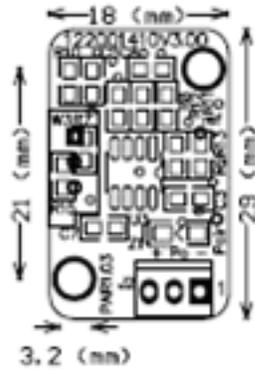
Drive Gas Pressure Sensor Board, Top View
